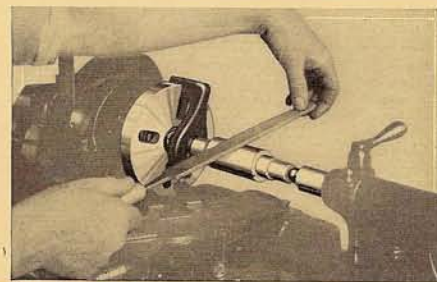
Lathe is Practical for Filing and Polishing Bushings, Shafts, Parts, etc.
